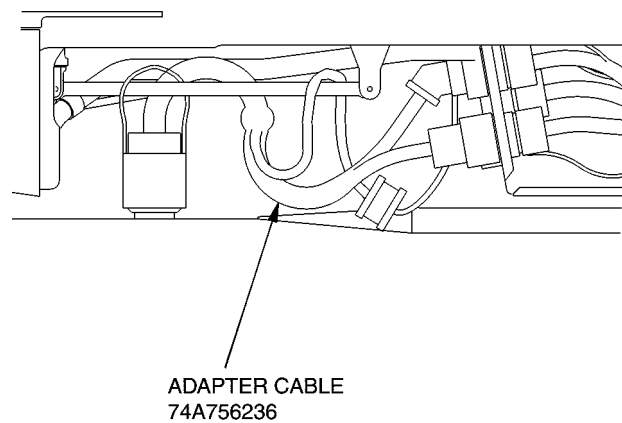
Fuel Tank Adapter Cable Installation (Centerline Station)
